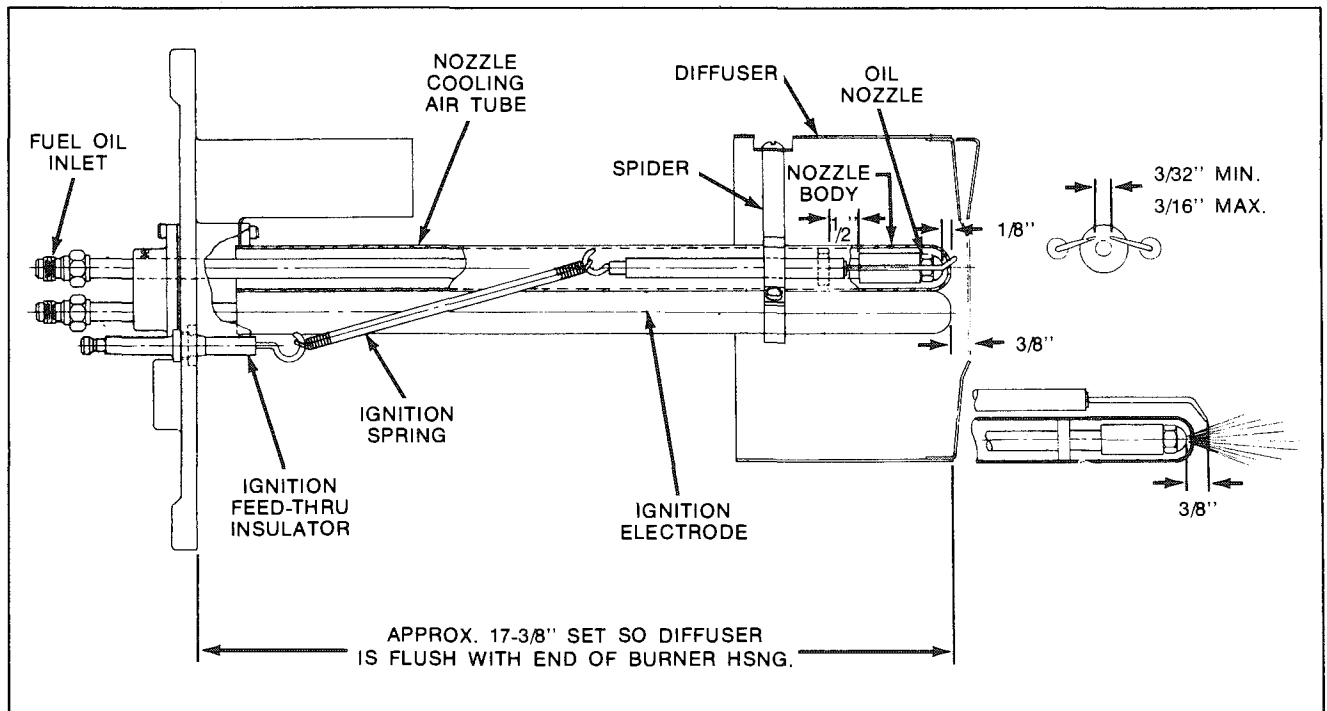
OIL BURNER, SPARK IGNITED-CBH 50-100
